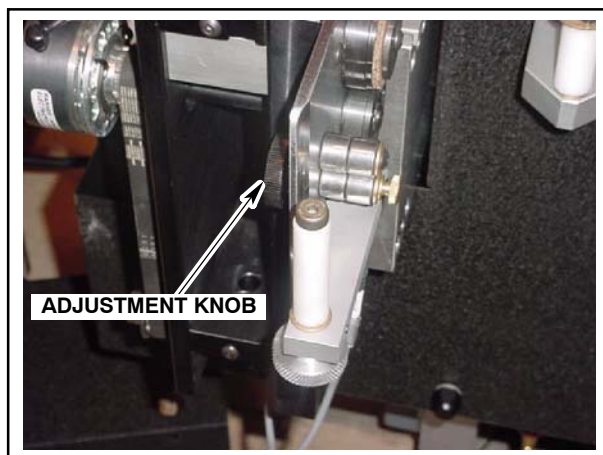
Loosen Folding Roller Guide Adjustment Knob
